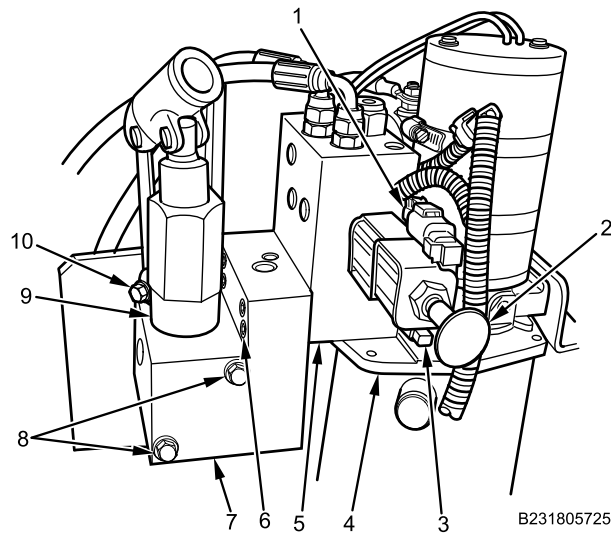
Hydraulic Power Unit Manifold and Module Installation.
